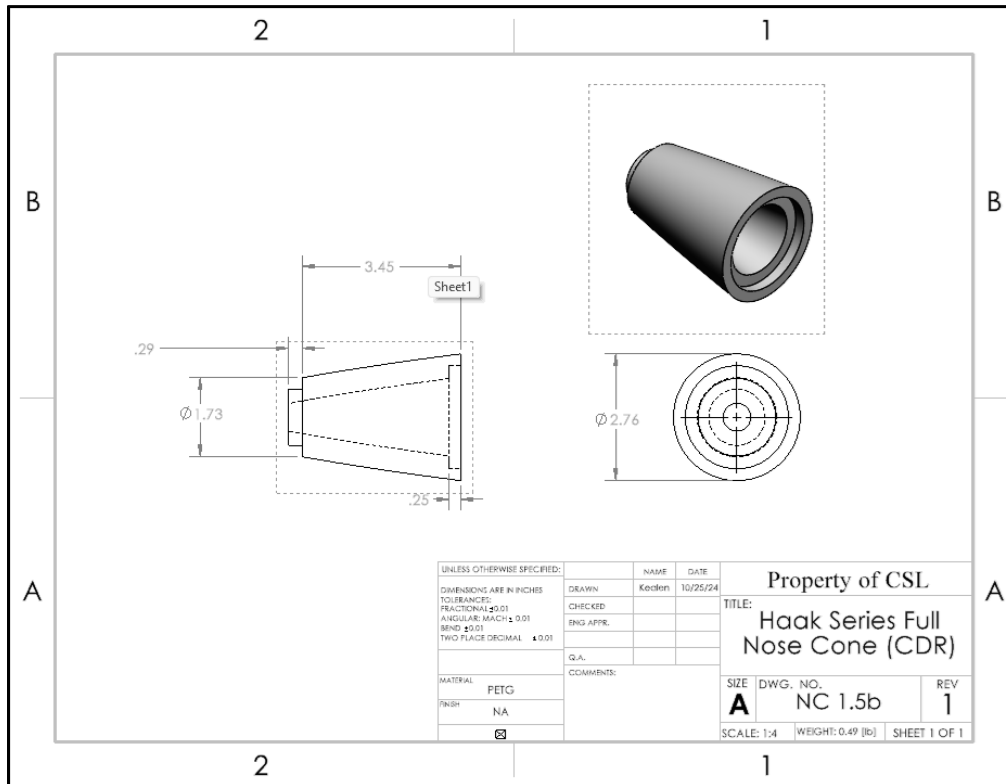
SolidWorks drawing of the cone upper middle.
